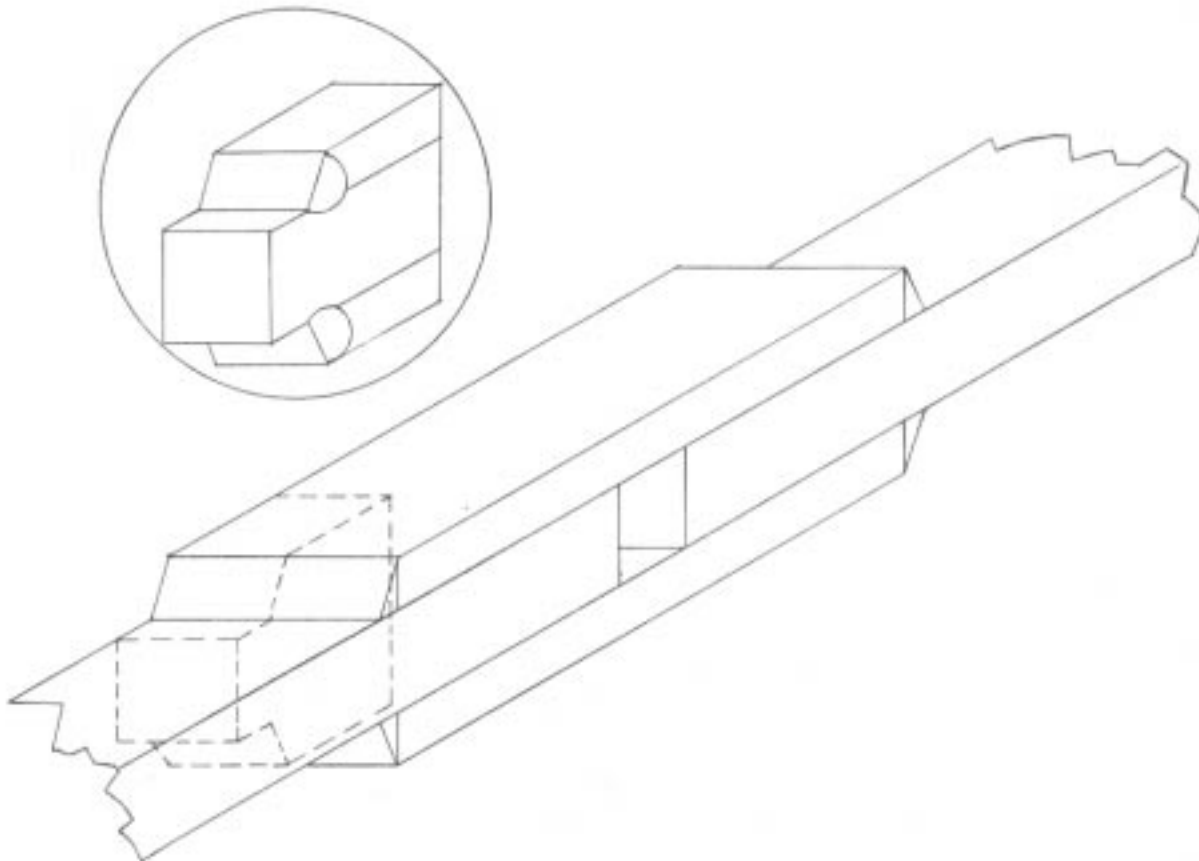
Typical Cross-Section Used For Macroetch of Transverse Fillet Weld Test Specimen
